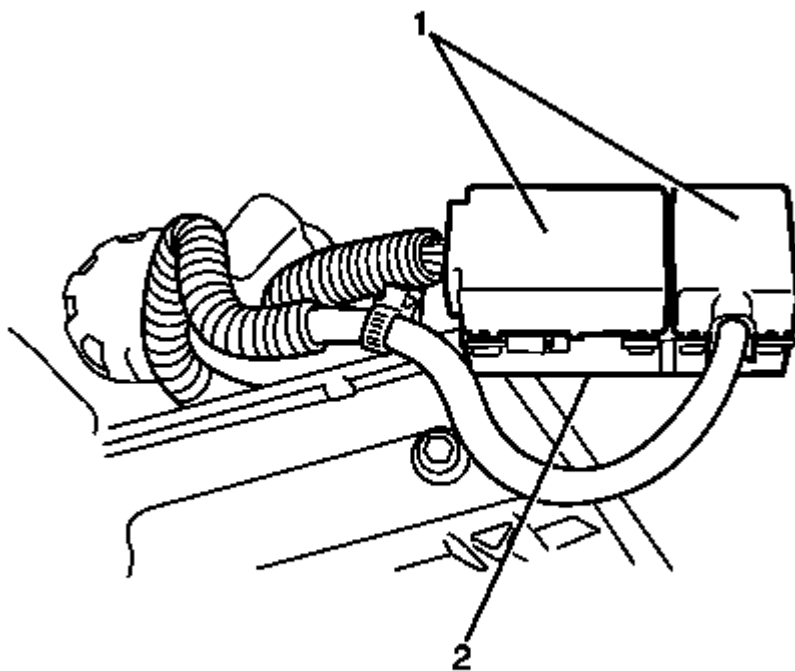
Identifying Positive Cable To Under Hood BEC Plate Retaining Bolt
